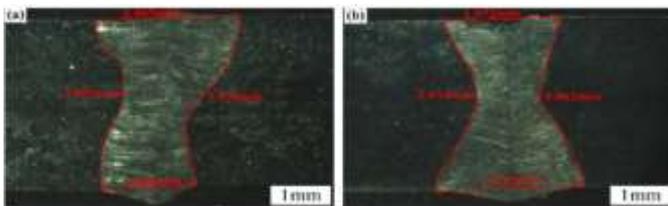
Weld bead geometry a) Case 1 b) Case 2 [6]
